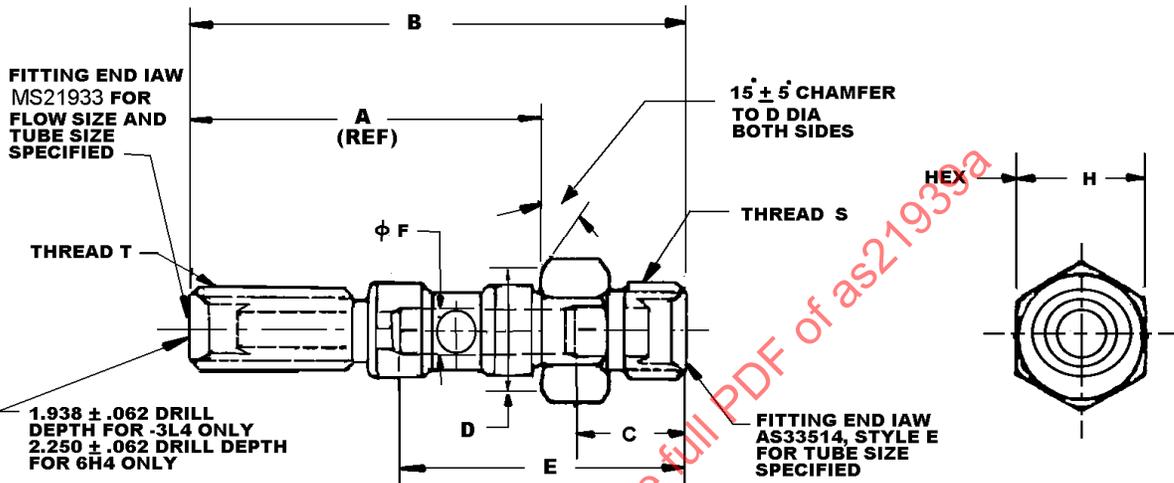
BOLT, CLUSTER FITTING, SINGLE PORT THROUGH, FLARELESS, DIMENSIONS AND CONFIGURATION
